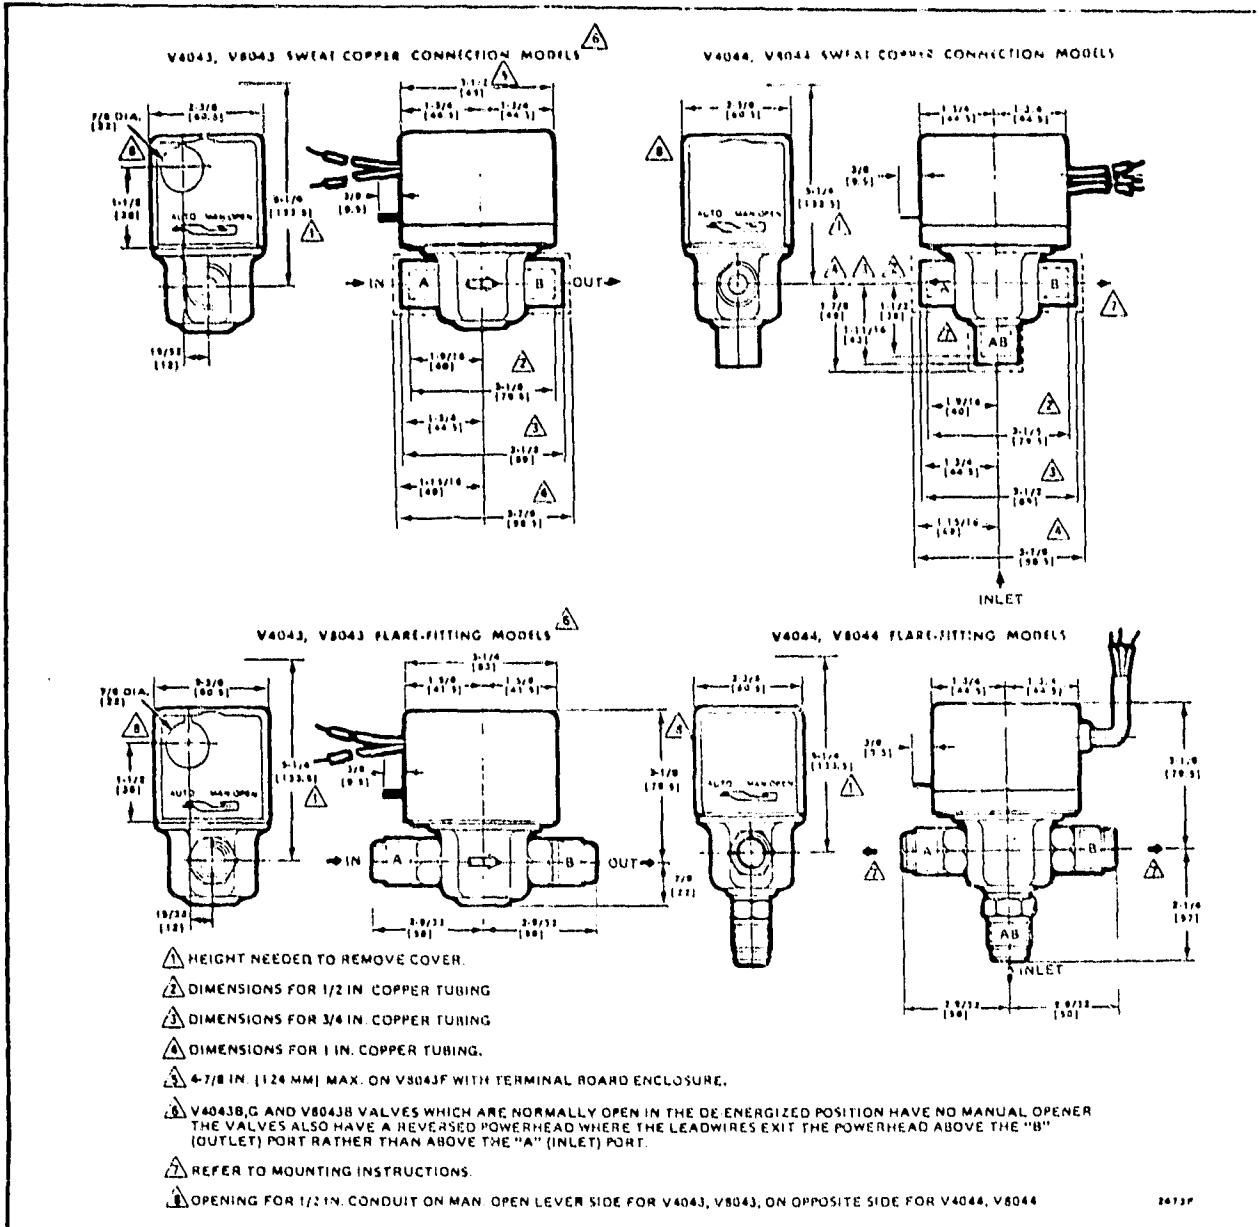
INSTALLATION DIMENSIONS IN INCHES [MILLIMETRES IN BRACKETS].
